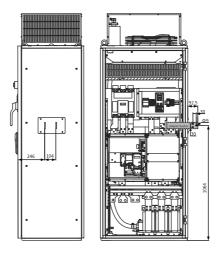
Dimensions of the position for installing the adapter busbar (unit: mm)
